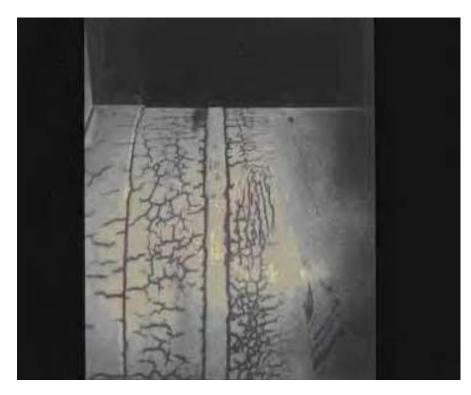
Dye penetrant (PT) inspection showing extensive OD PTA SCC around welds.
